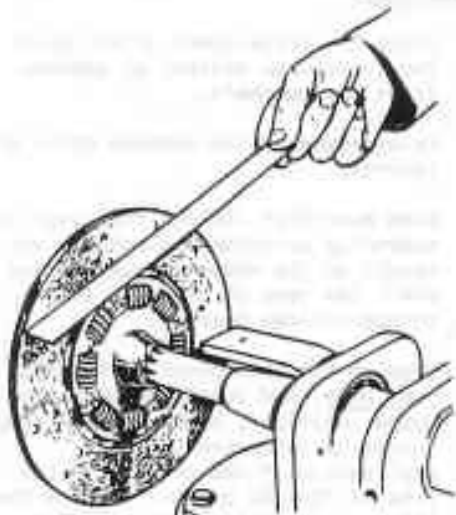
JIG FOR CHECKING PARALLELISM OF FACES.
